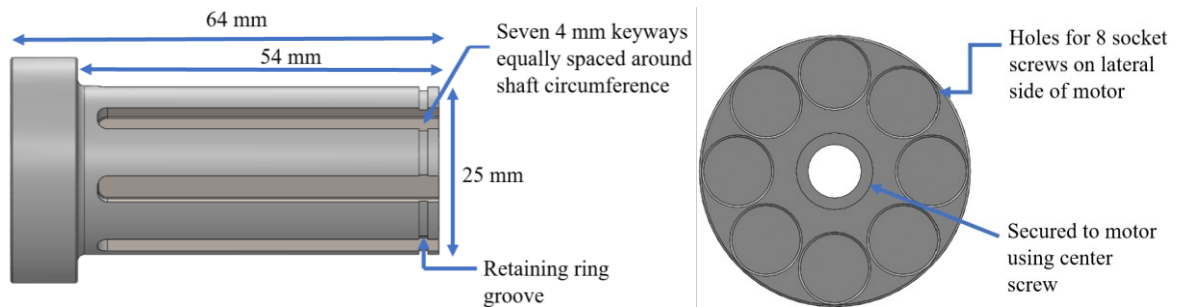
Side view (left) and back view (right) of the distal shaft
